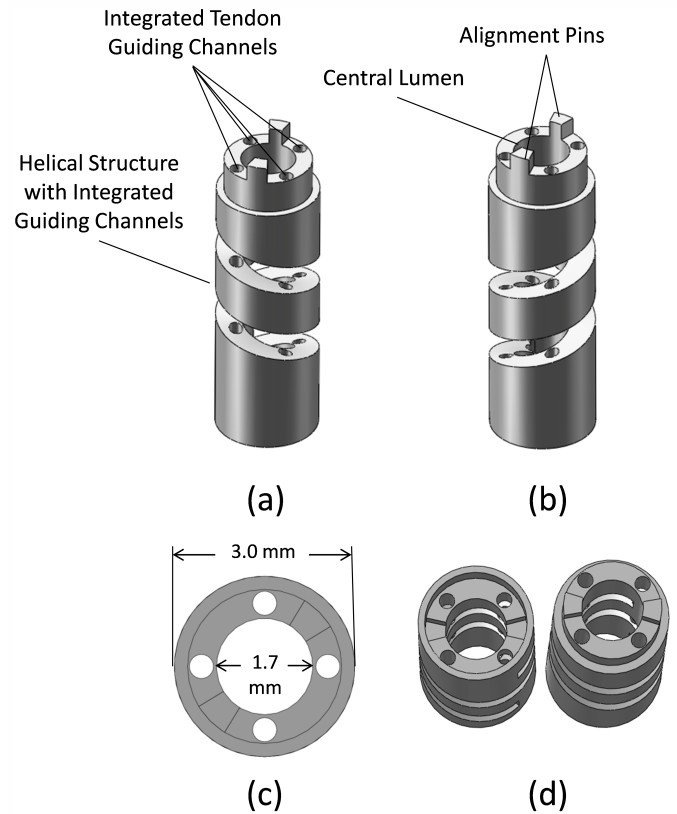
(a) Schematic view of a clockwise (CW) segment. (b) Schematic view of a counter clockwise (CCW) segment. (c) Cross section view of a segment. (d) Bottom view (left) and top view (right) of a segment.
